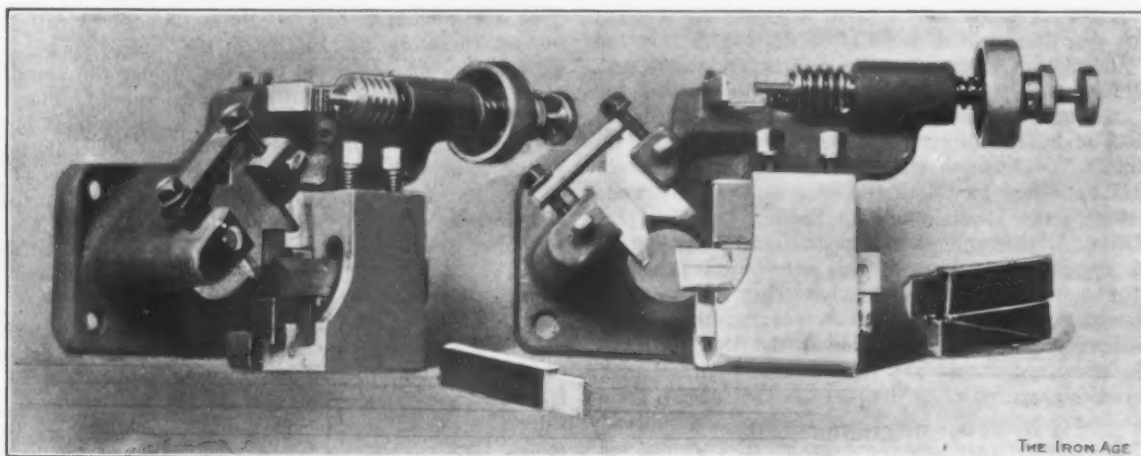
Tool Holder with Cutter for Turning Away from the Head.
